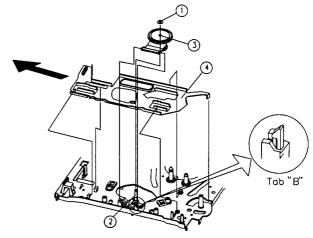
21 REEL GEAR TOTAL ASSY & CONNECT PLATE REMOVAL
